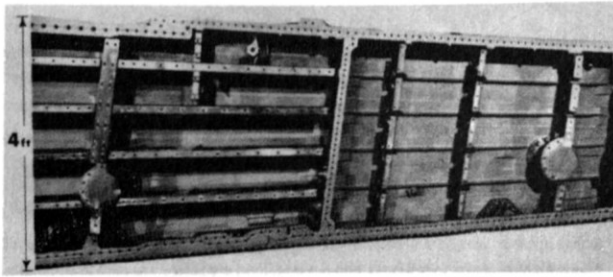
An exposed view of a section of fighter wing (North American F-100) showing the dimension and internal full-depth rib construction.
